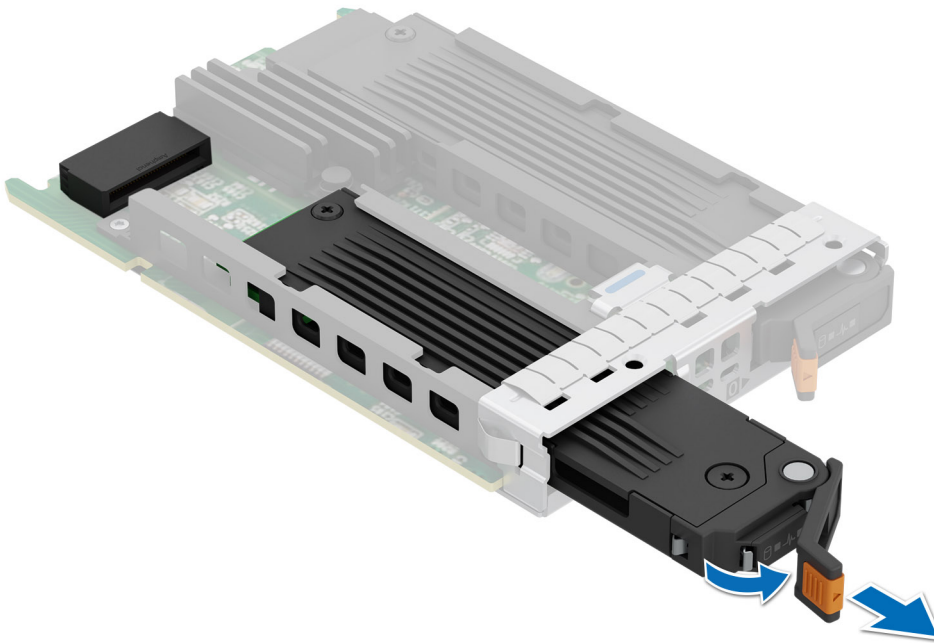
Removing the BOSS-N1 DC-MHS carrier
